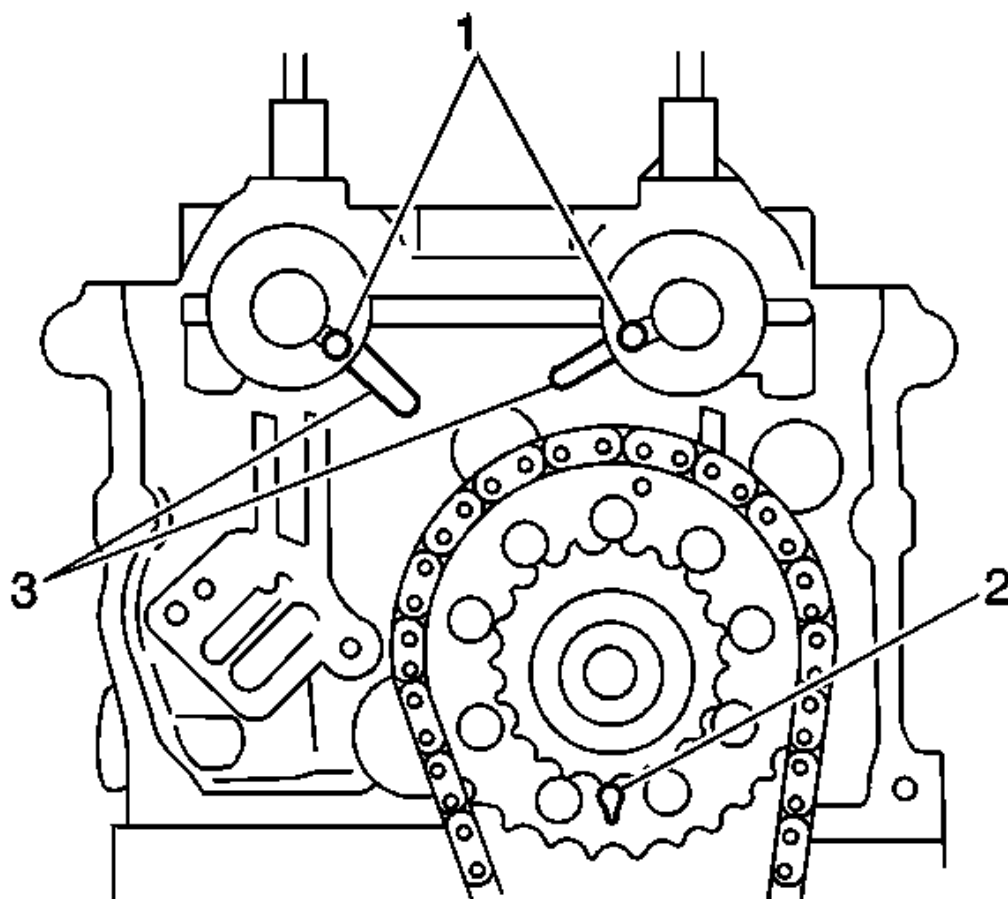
View Of Camshaft Guide Pins, Notches & Idler Sprocket Arrow
